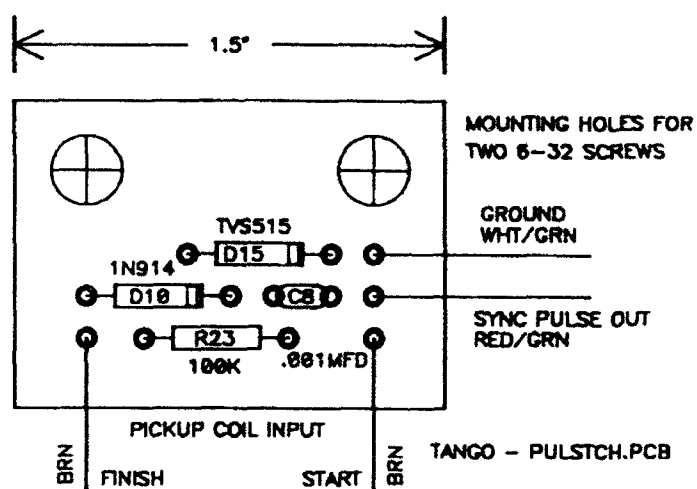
PULSE STRETCHER BOARD COMPONENT LAYOUT
